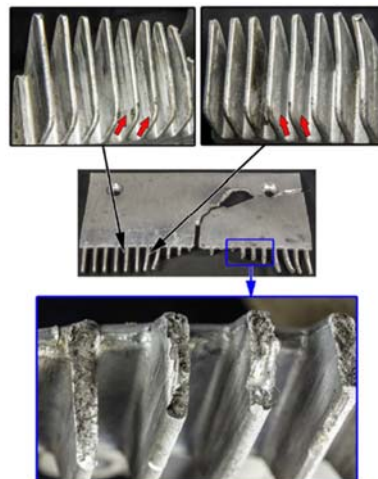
Macroscopic fractography of the escalator comb plate (No. 3#).
